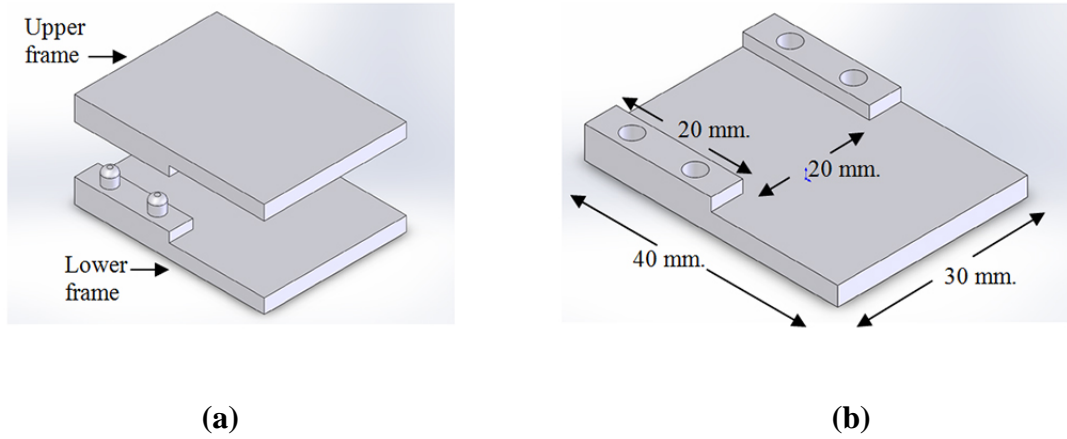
(a) Designed assembly and (b) dimensions of EDLC
